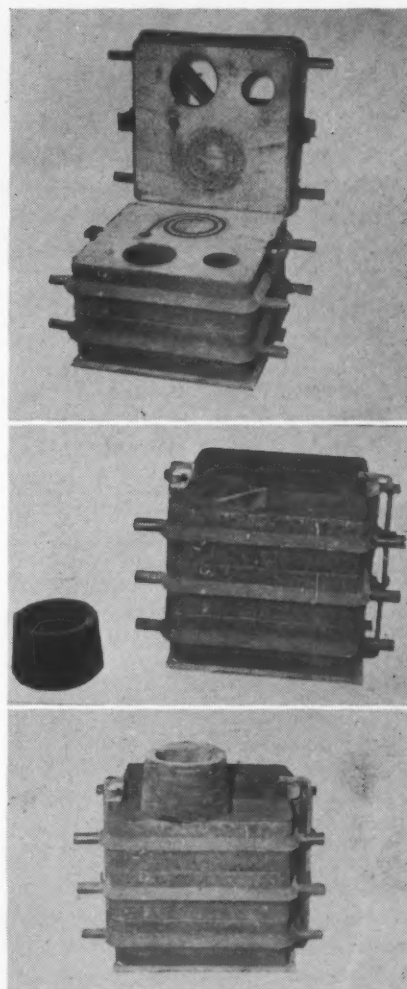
Mold for Large Fluidity Test Piece. Top—Mold Unassembled. Center—Mold Showing Baffle Plate. Bottom—Mold Ready for Pouring.
